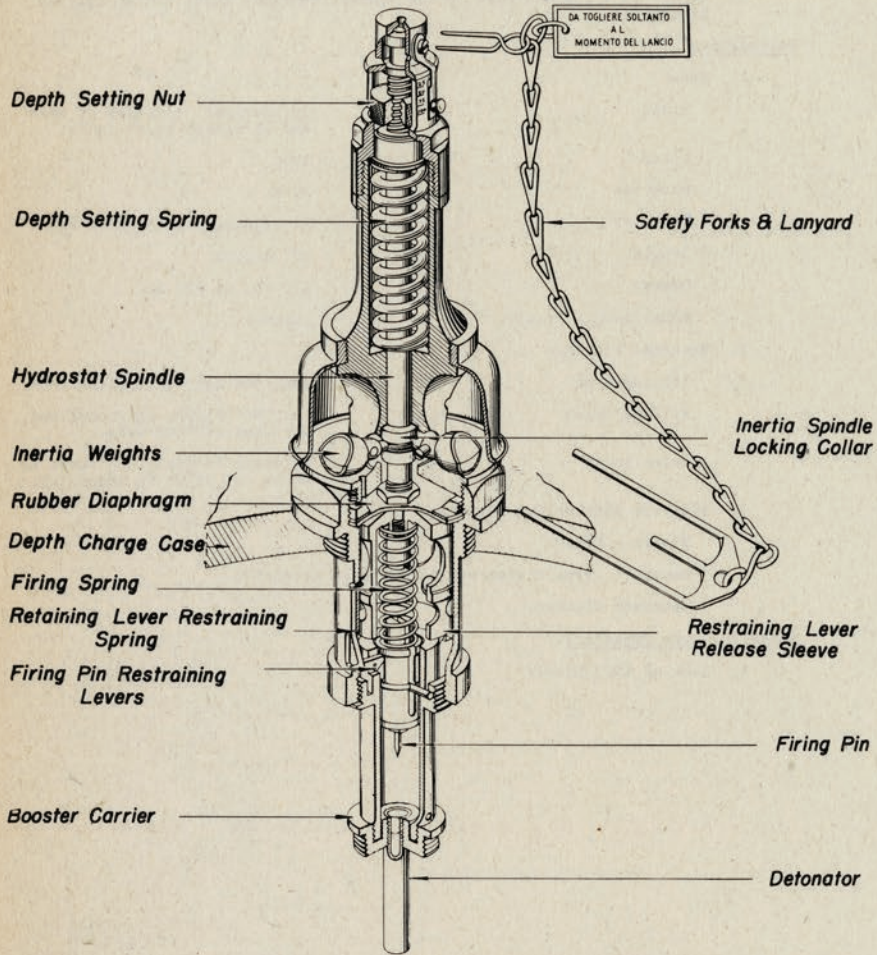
Depth Charge Pistol Type A, Sectional View.
